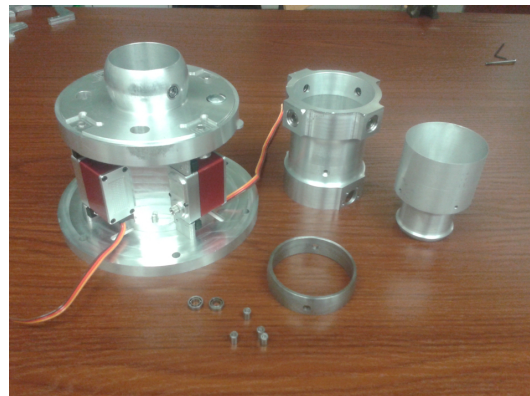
Aluminum demonstrator with a steel central gimbal ring before the assembly
